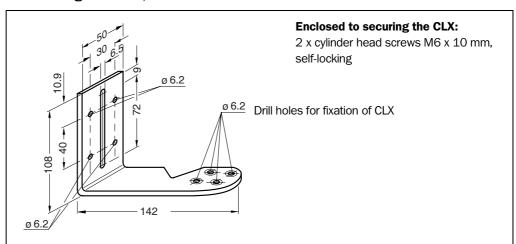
Dimensions of the angle bracket, single No. 2022996
